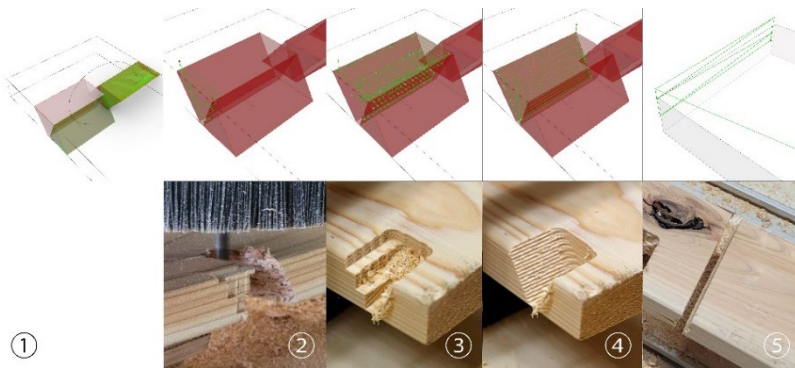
(1) Dividing the joint geometry to 2-side s, (2) Cutting the edge from outside, (3) Material Removal, (4) Smoothing one needed surface, (5) Cutting the member in length
